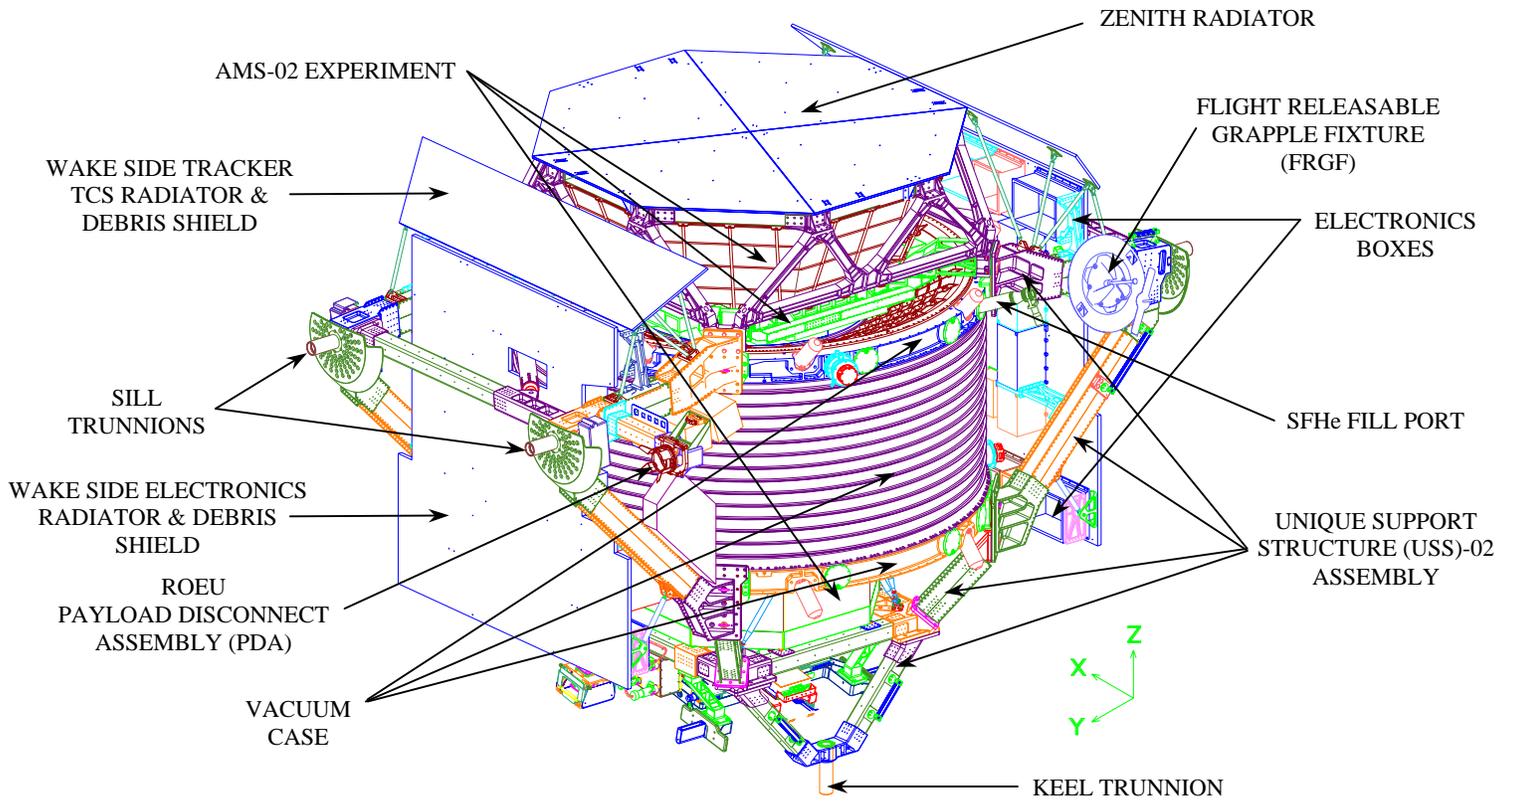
AMS-02 Payload Assembly (View 1 of 4)
